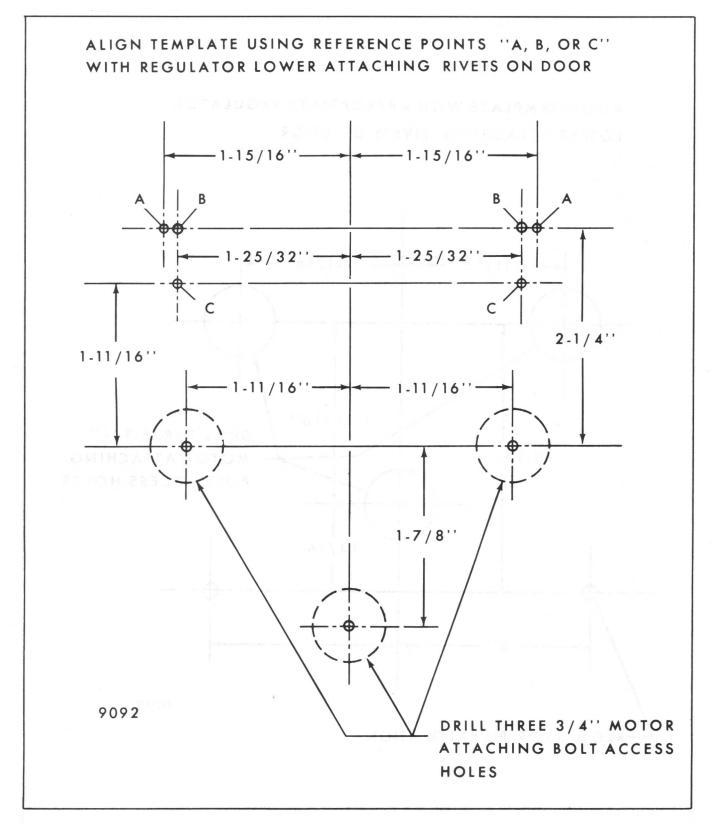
Window Regulator Lower Attaching Rivet Reference Points for Locating Window Motor to Regulator Attaching Bolts
